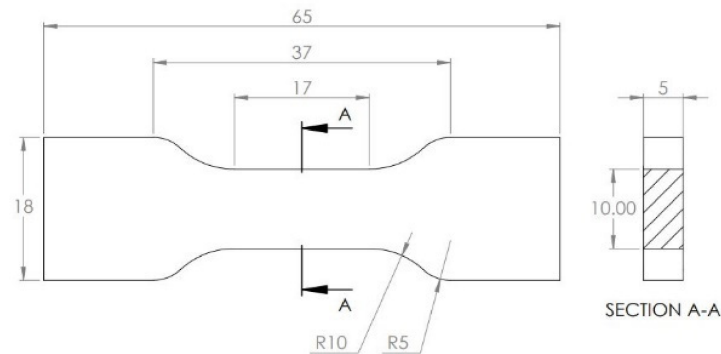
Nominal dimensions of a tensile test specimen, with a section view of the gauge section.
